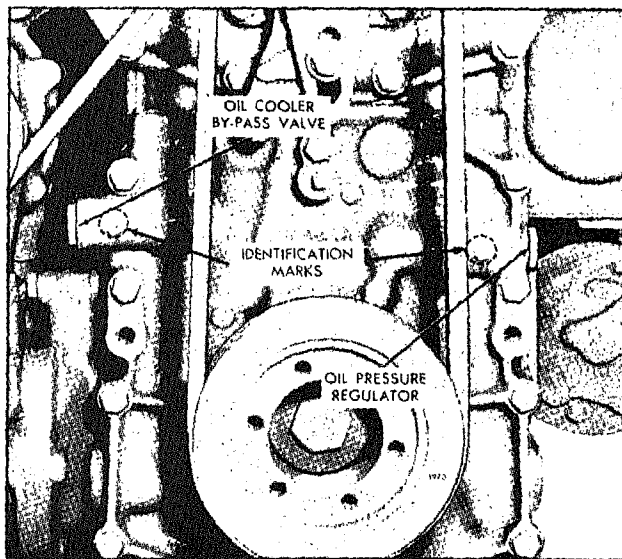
Location of Current Oil Pressure Regulator Valve - In-line Engine Shown
